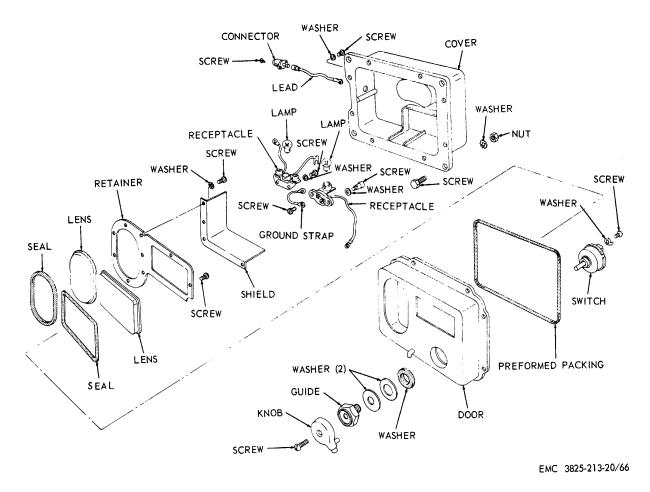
Dome light assembly, disassembly and reassembly exploded view.
